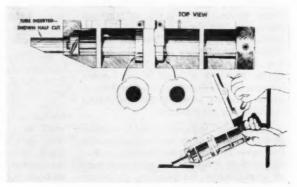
shows a combination fixture which has been used in assembling, drilling, and trimming contoured sheet metal parts. It comprises a metal frame and a wood base, both shaped so that they can "sandwich" the subject parts. Holes are drilled in the parts through bushings in the frame, after which the parts are routed along the edges of the base and the frame is removed to permit assembly of the parts by riveting and bolting.
